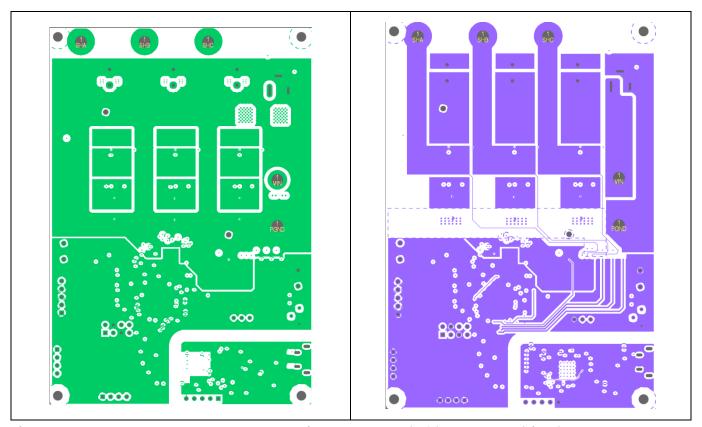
EVAL_6EDL7151_36V_1kW PCB internal layer 3 (left) and layer 4 (right)
